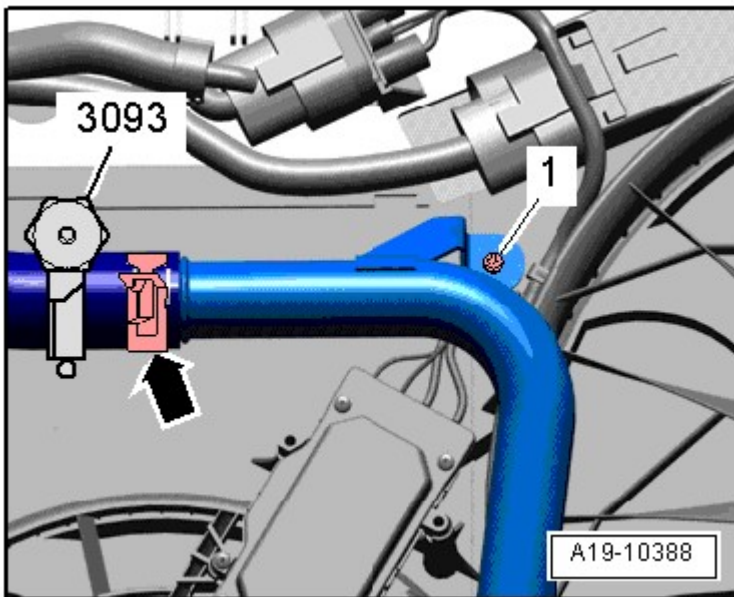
Identifying Coolant Hose -Arrow- From Front Coolant Pipe
